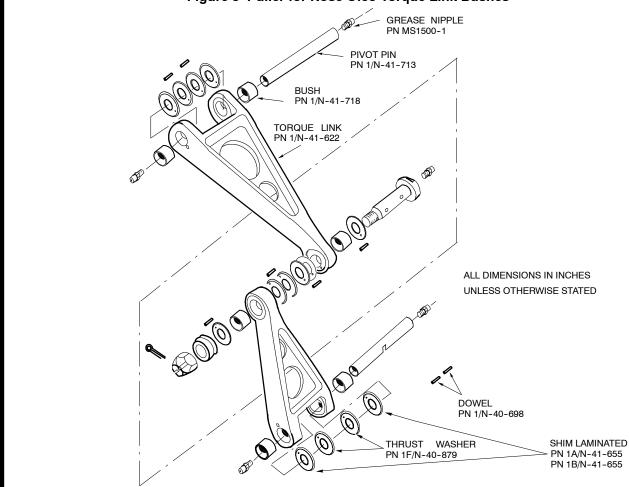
Post Mod N161 Torque Links Assy 1/N-41-719 (Assy Components)
